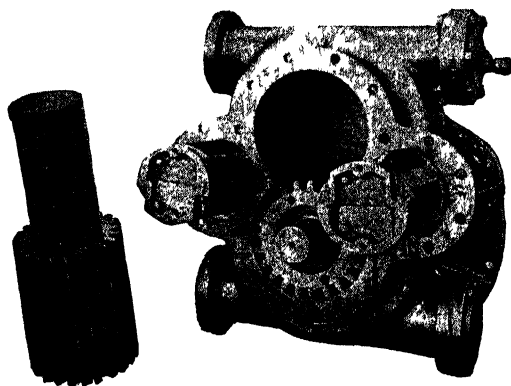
Direct Engine Driven Main Oil Pump Partly Dis-assembled
